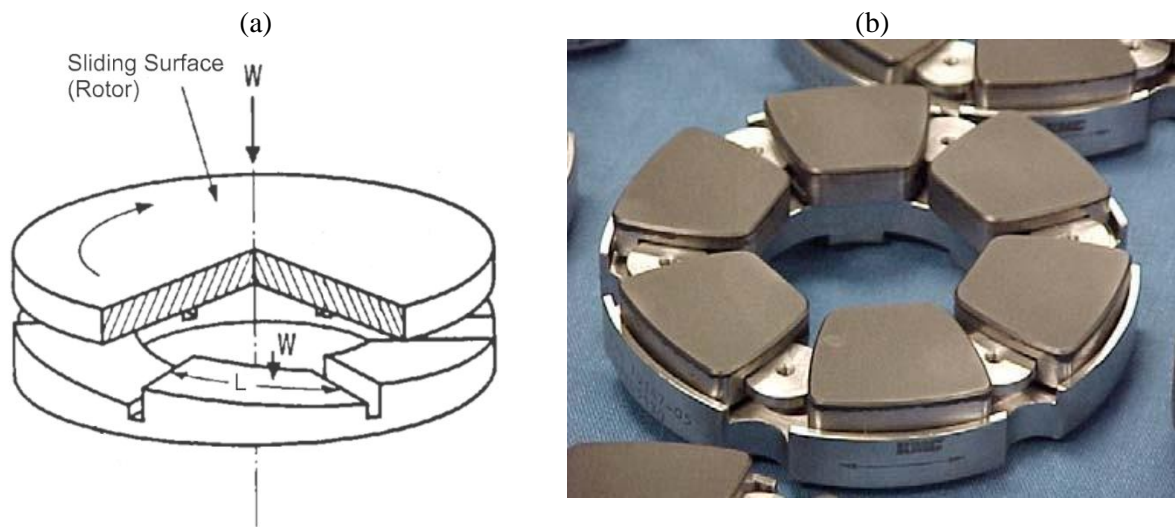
(a) Sketch of the thrust bearing and the wedge-shaped lubrication zone, (b) Image of a real thrust bearing with six sector-shaped pads.
